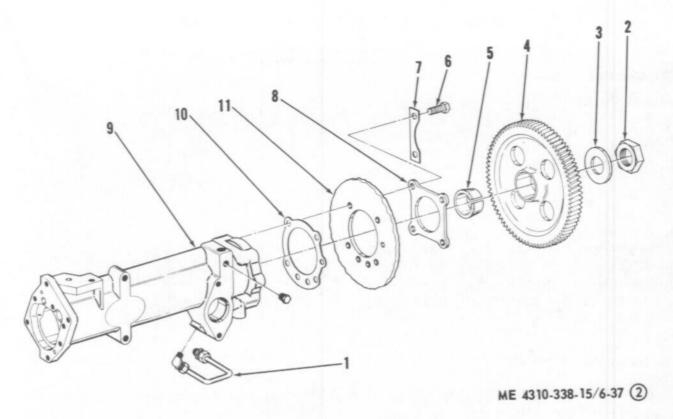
Accessory drive shaft and housing, removal and installation (sheet 2 of 2).
